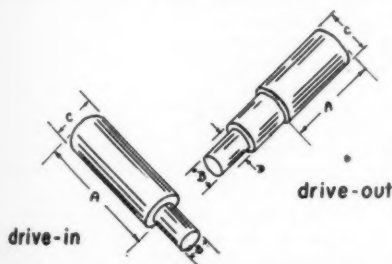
BEARING PUNCHES FOR REPAIRING MOTORS.
